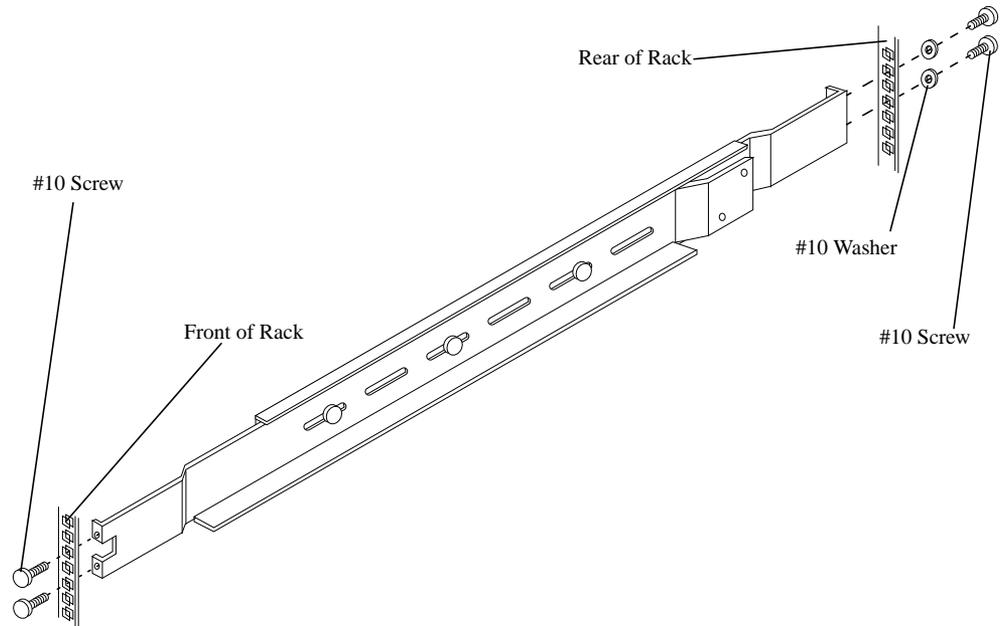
Fastening Rail/Support Assembly to Square/Through-Hole Rack (Left Hand Side)
